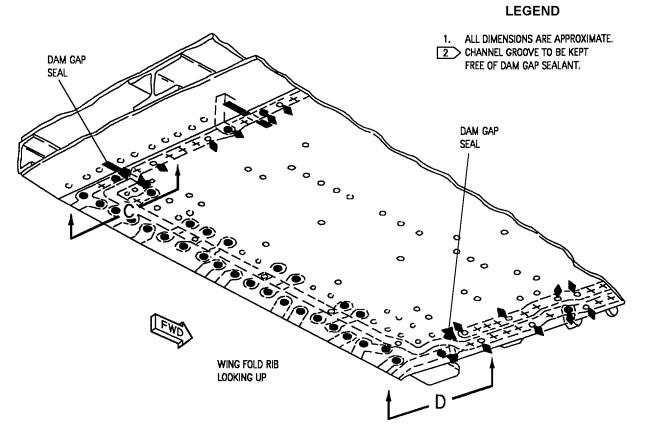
Wing Fold Rib Dam Gap Seal Repair (Sheet 1)
